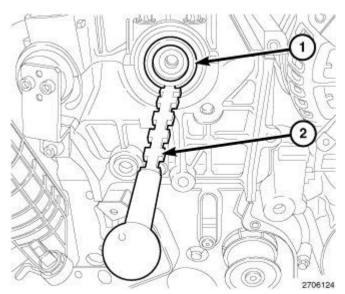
SEAL REMOVER & SEAL Courtesy of CHRYSLER LLC
